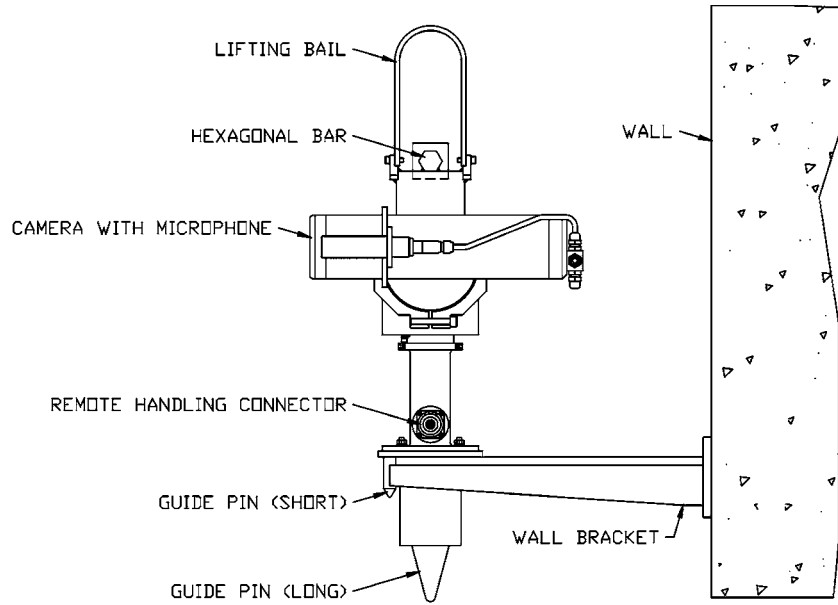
Typical Manipulator Accessible Camera Installation (Elevation View)
